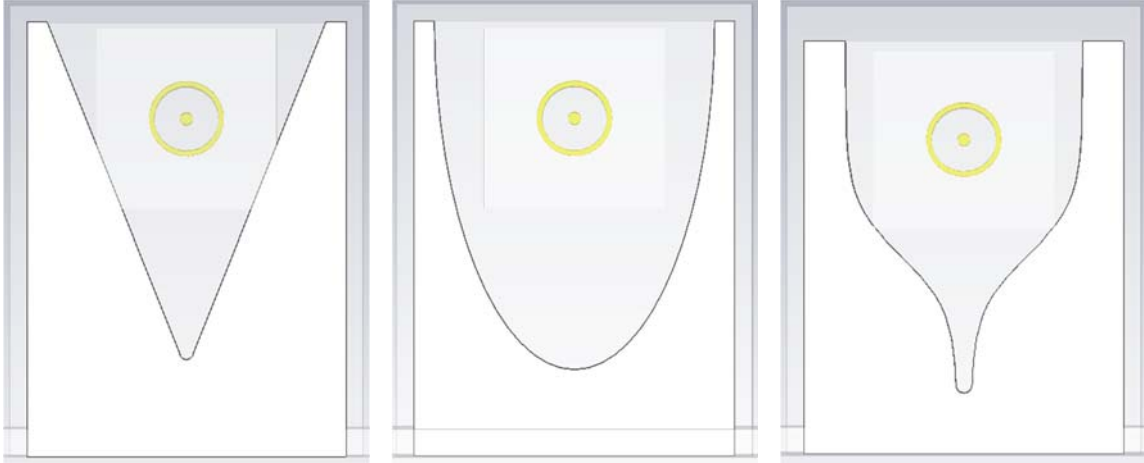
Top view of modified process seal inserts for a waveguide-to-coax adapter. (a) Triangular geometry. (b) Elliptical geometry. (c) Ogee geometry.
